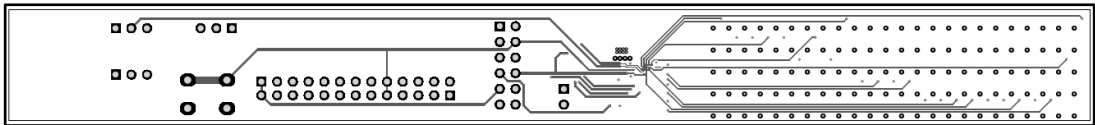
STEVAL-LLL001V1 evaluation board - bottom layer
